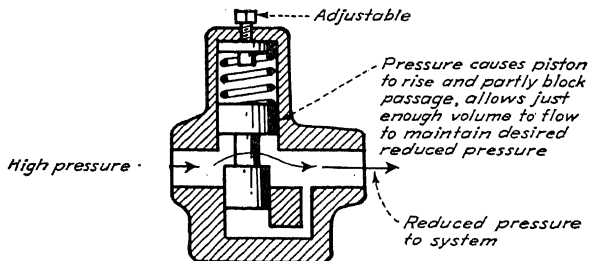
Pressure-reducing valve. (Courtesy of Product Engineering.)
